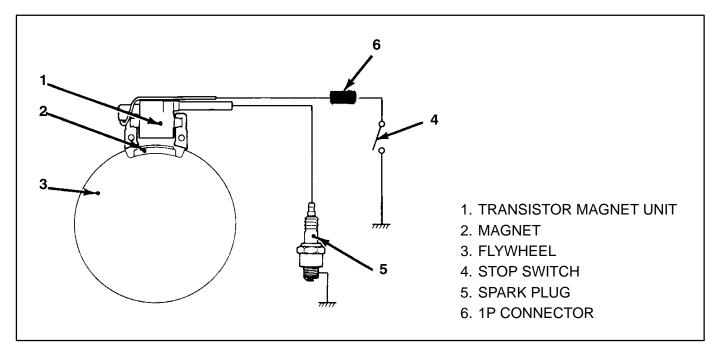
TRANSISTOR MAGNET IGNITION, GH170 AND GH280 ENGINES
